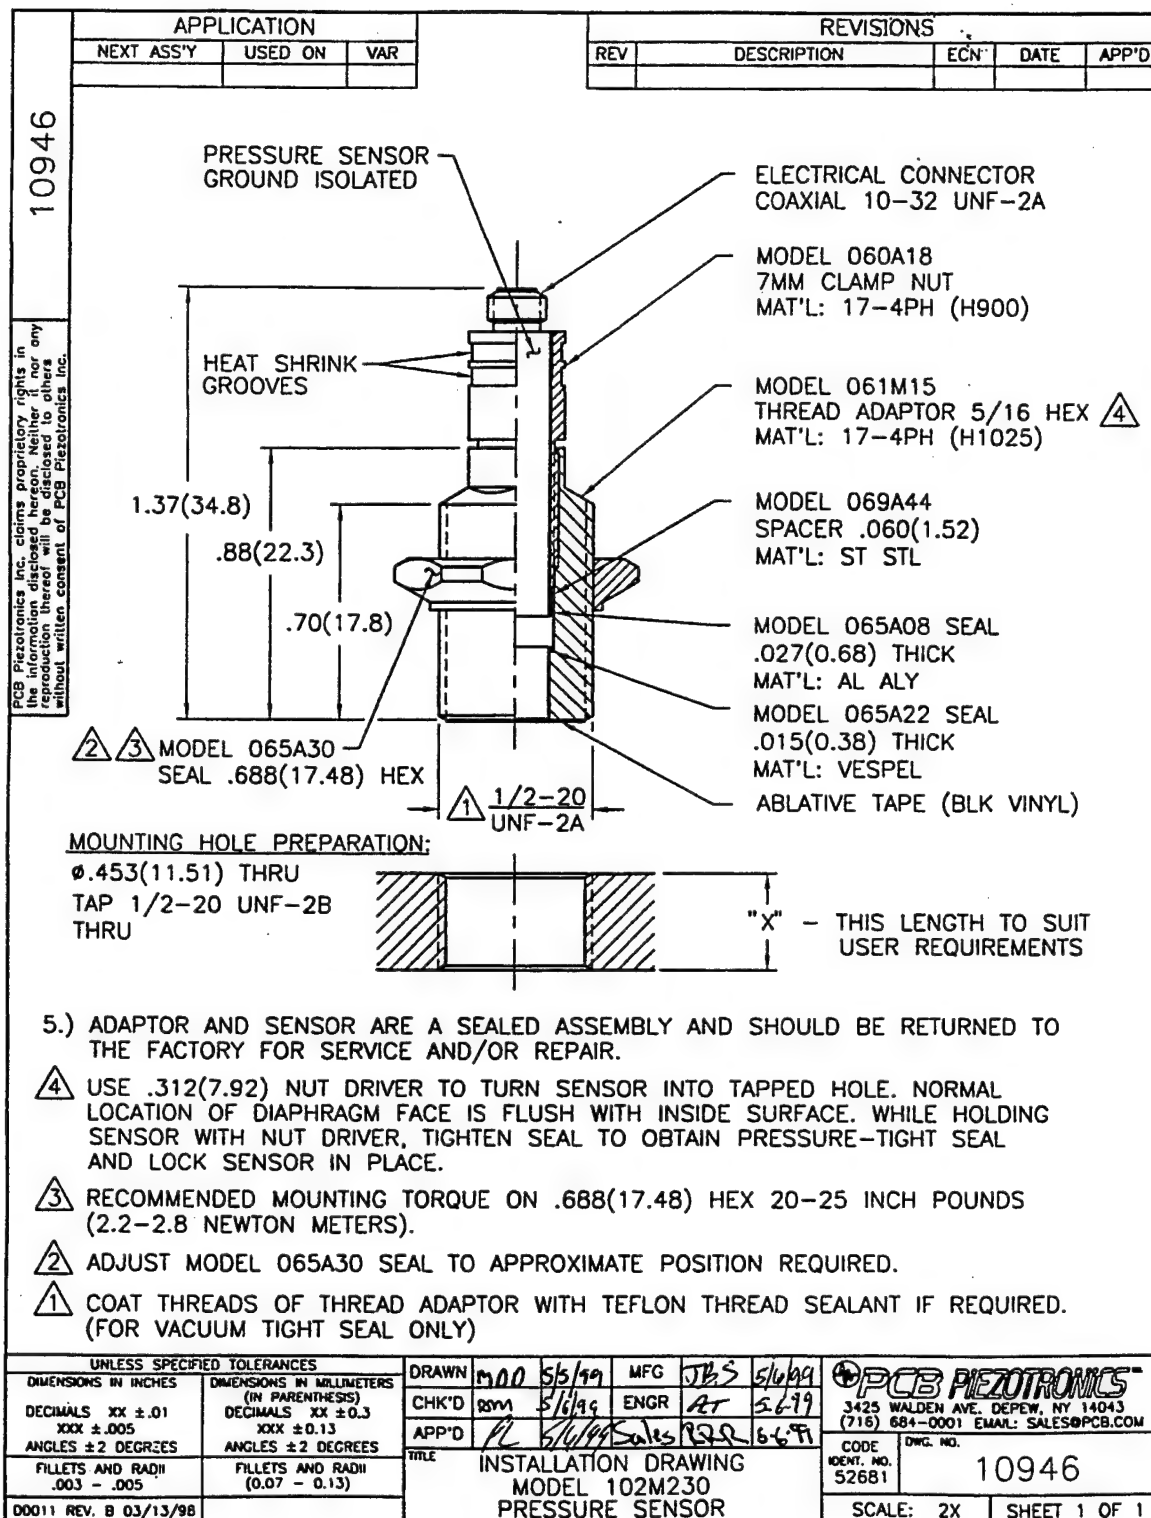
Engineering drawing of PCB 102M230 pressure gauge.
